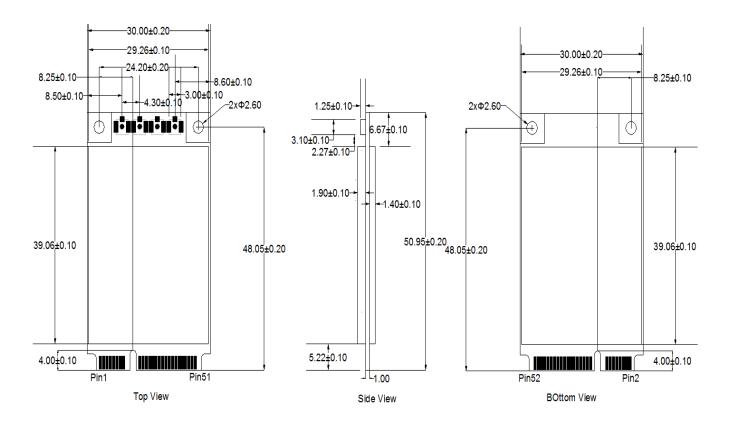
Mechanical Dimensions of EP06module (Unit: mm)
